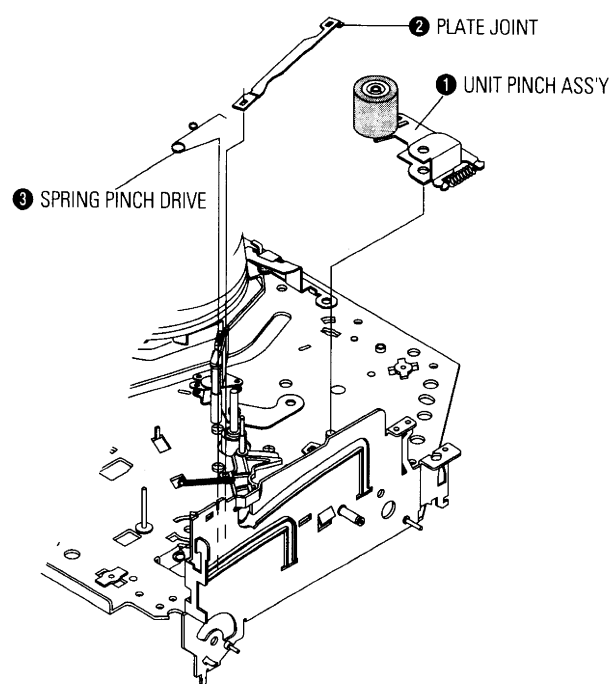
Unit Pinch Ass'y, Plate Joint, Spring Pinch Drive Removal
